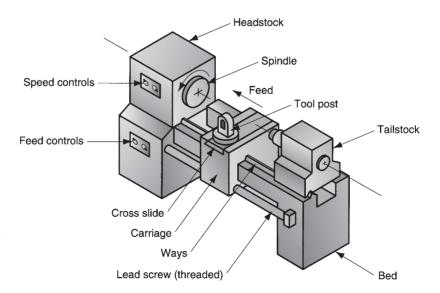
Diagram of an engine lathe, indicating its principal components.
